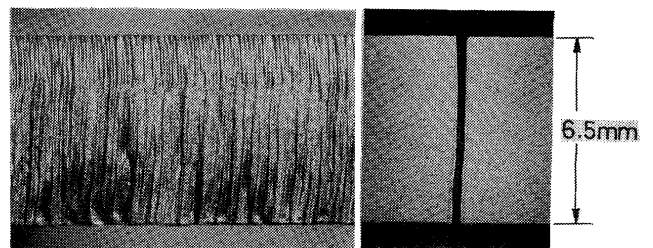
Example of the laser gas cut. (thickness : 6.5 mm, laser power : 1 KW, cutting speed : 100 cm/min, focal length : 127 mm)
